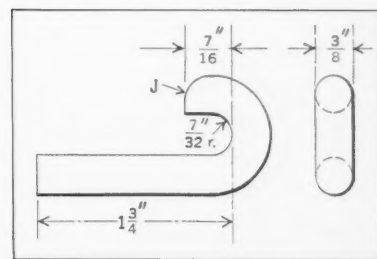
Hook-bolt Formed and Cut off by Die Shown in Fig. 2
